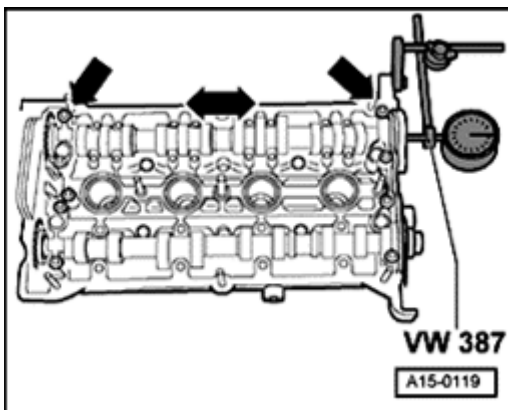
Camshaft Axial Clearance, Checking - Intake Camshaft
